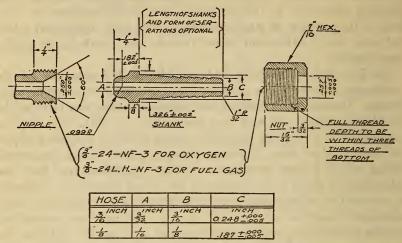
"A" size of standard hose connections for welding and cutting torches
